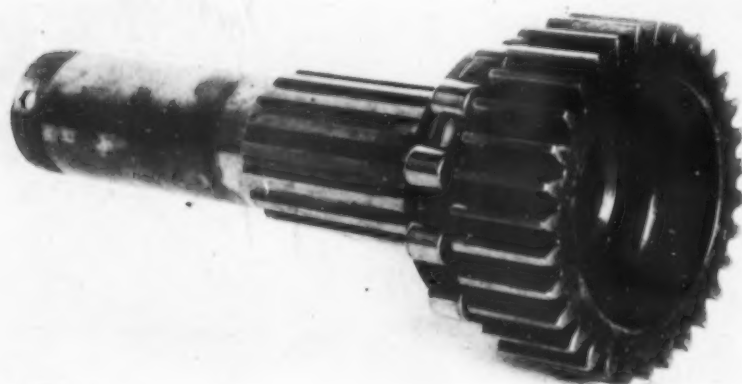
Bramo Fafnir 323P crankshaft coupling gear.
